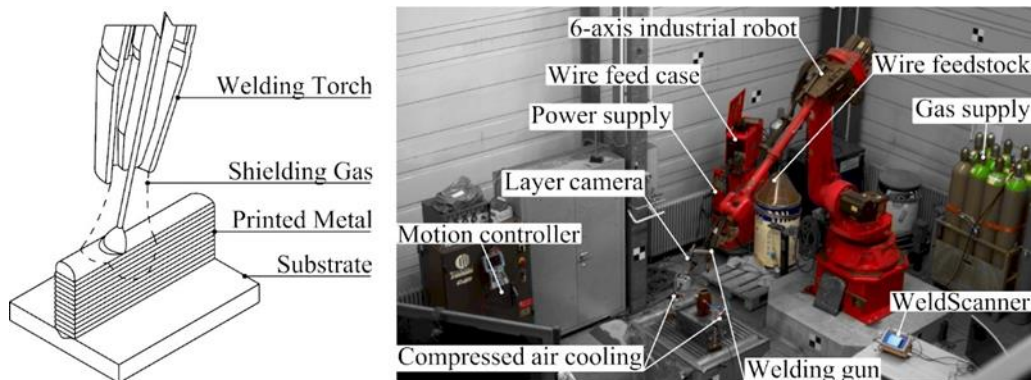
a) Material deposition of continuous welding in detail; b) WAAM-system at TU Darmstadt
